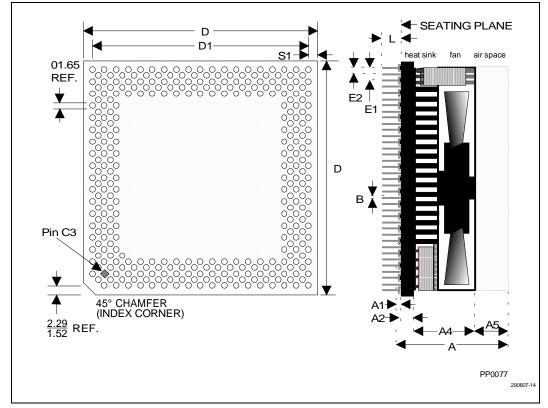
Pentium® OverDrive® Processor with MMX™ Technology Package Dimensions
